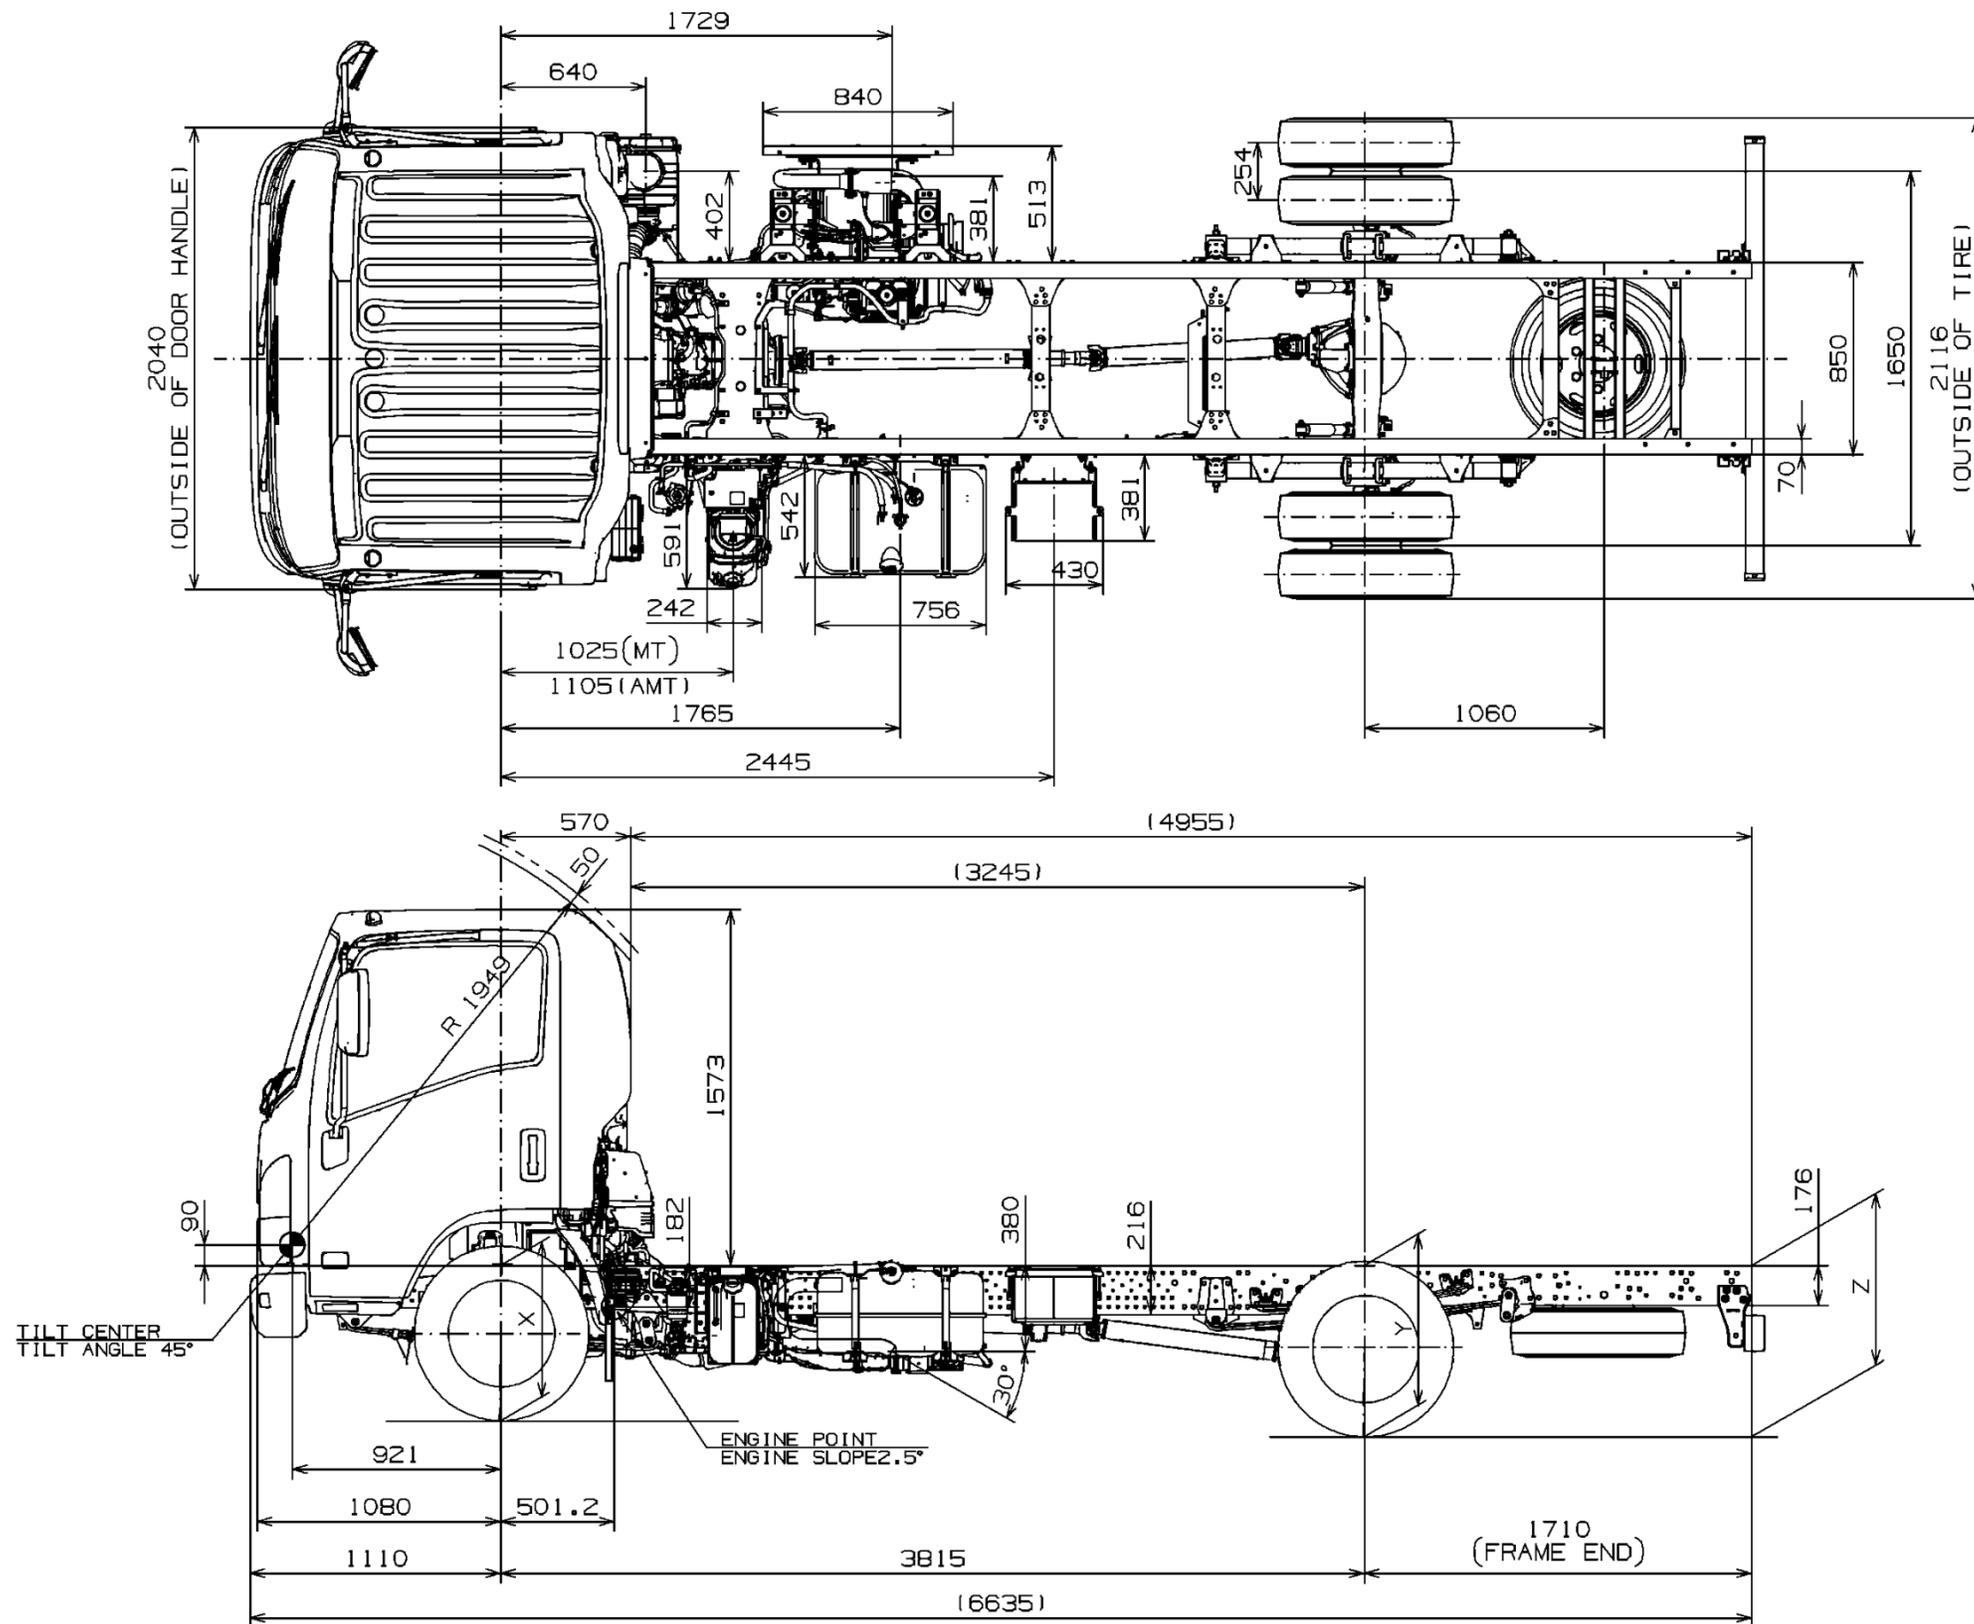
Cab Chassis Drawing NPR85L/U-ML5VAYE
